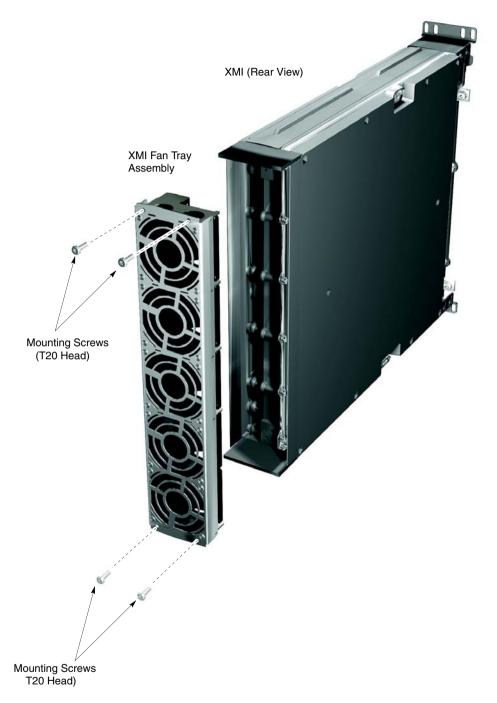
XMI Fan Tray Assembly (Removal & Installation)
